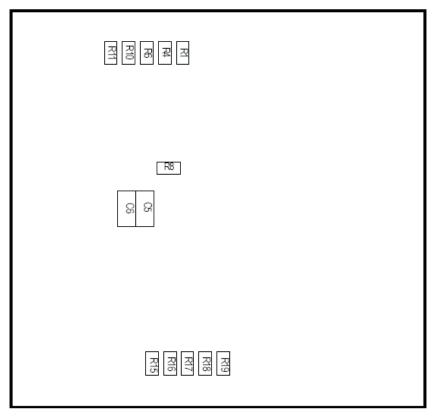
TPS53316EVM-075 Bottom Assembly Drawing (bottom view)
